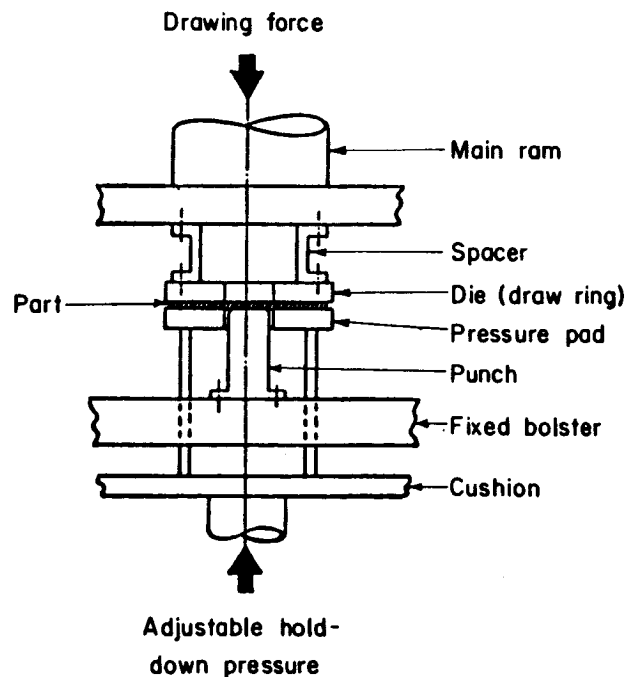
DOUBLE-ACTION DRAW DIE (REF. 53)
